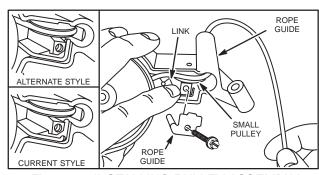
INSTALLING PULLEY ASSEMBLY
